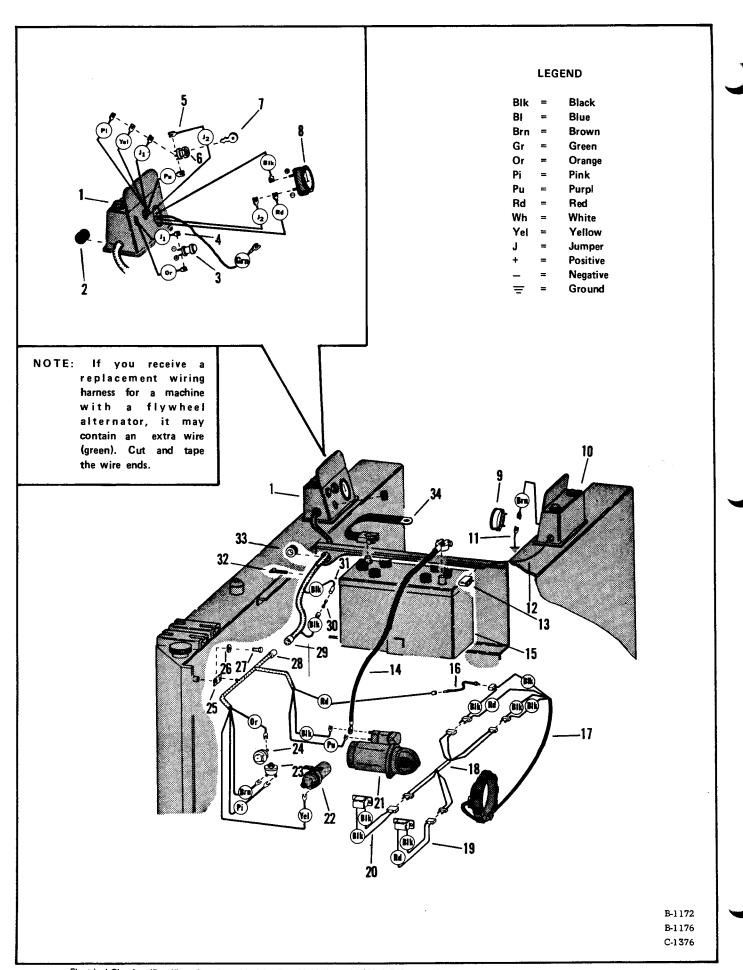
Electrical Circuitry (Rectifier - Regulator Module, Two Unit) (Later M-600, VF4D Engine)
